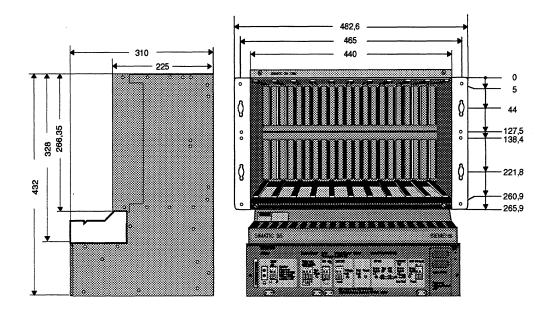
Device dimensions of the S5-155U central controller (in mm)
